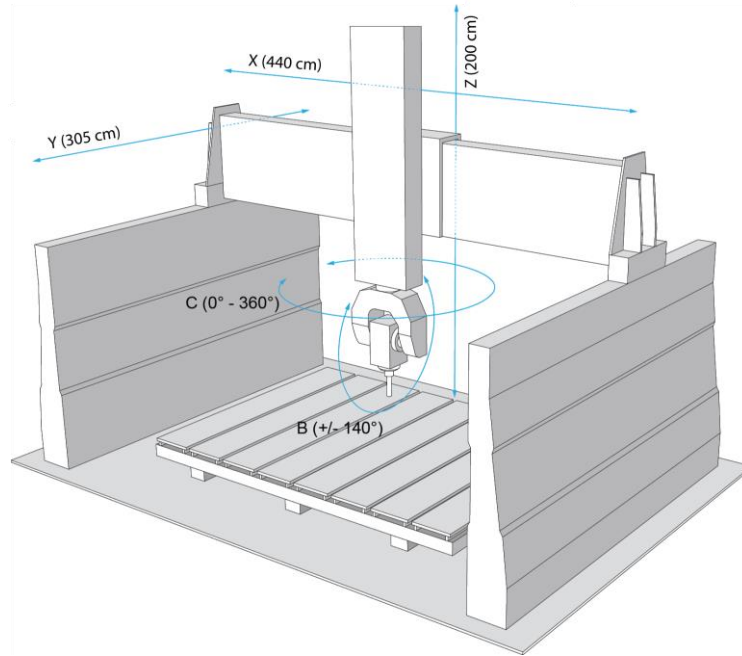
Diagram of the OMAG Blade5 NC900 5-axis CNC machine with all axes marked
